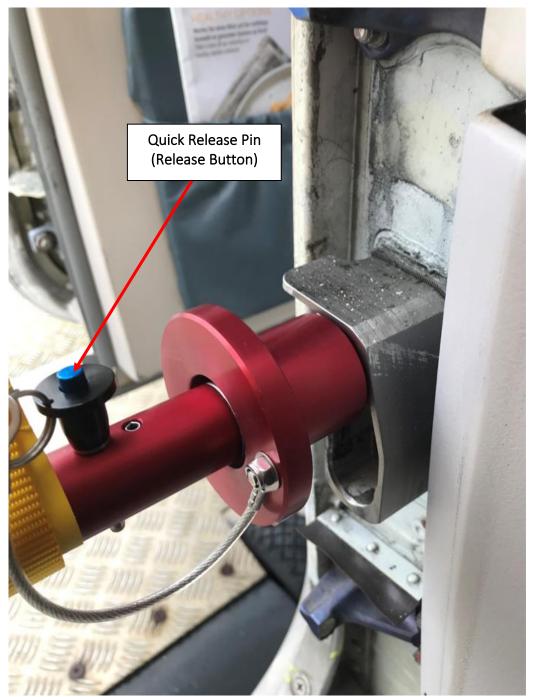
Bottom Spring-loaded and Quick Release Pin in position.
